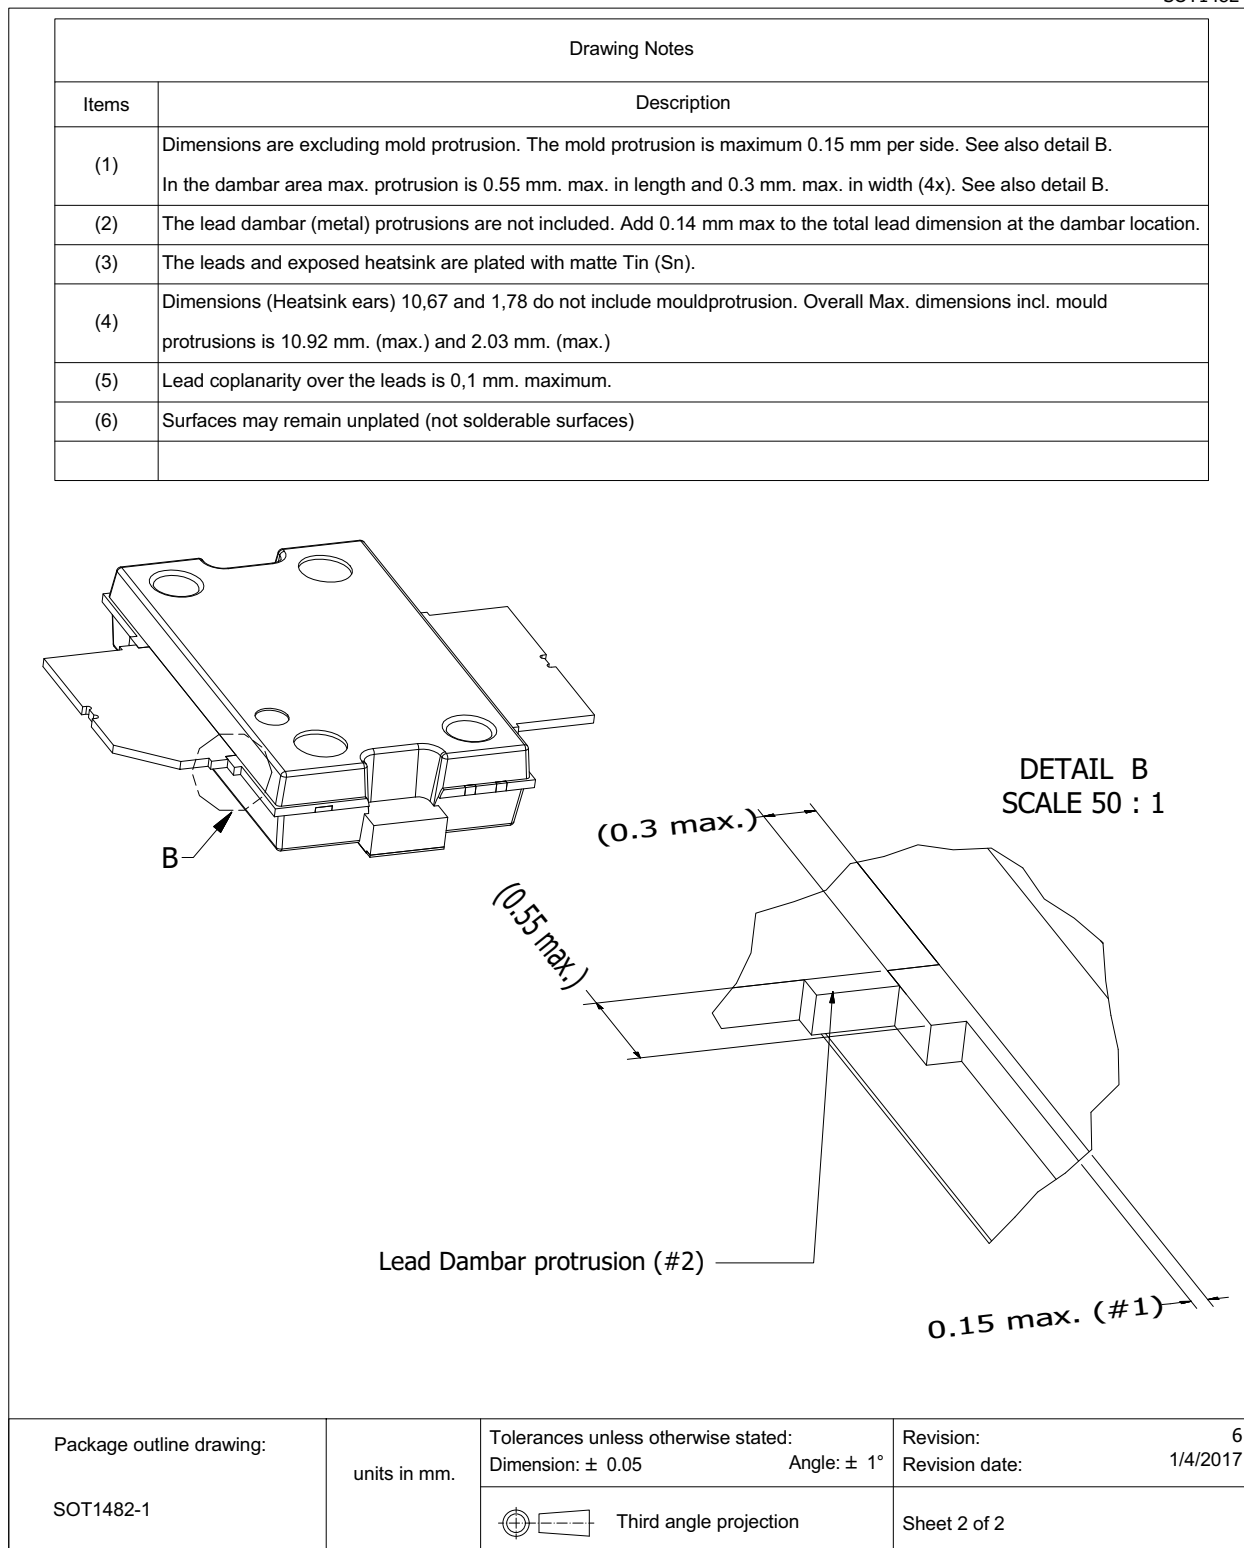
Package outline SOT1482-1 (sheet 2 of 2)
